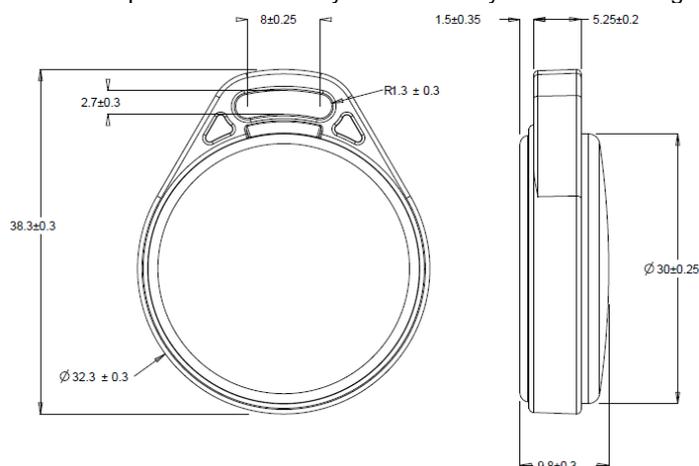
EMBC01 product with key-fob accessory outline dimensions
